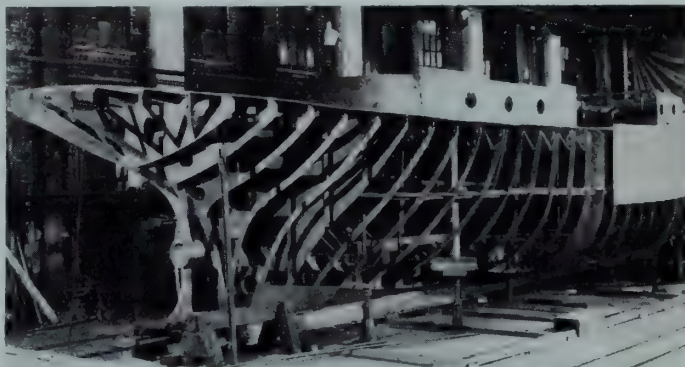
Framing for all-welded ship, with plating partly assembled.
